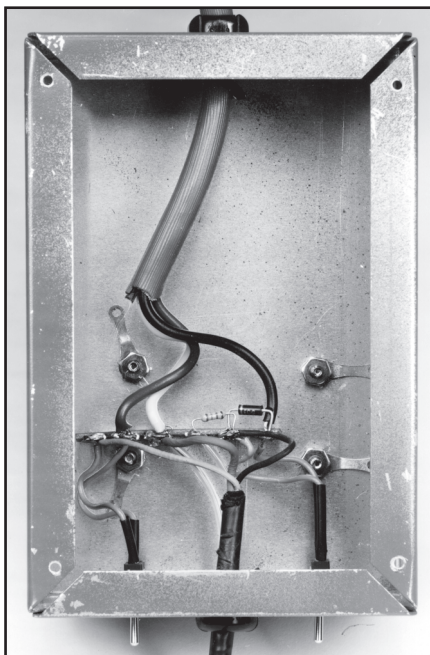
View of the soldering-station chassis underside with the bottom plate removed. #24 hookup wire is adequate for all connections. Make sure no possibility of a short circuit exists.
